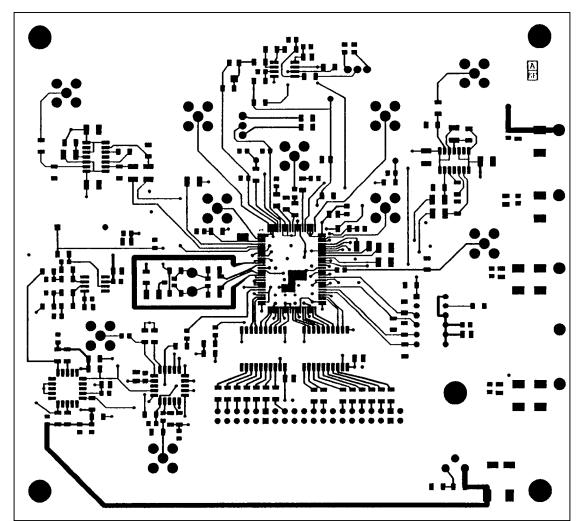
MAX2101 EV Kit PC Board Layout—Component Side (Positive Image)
